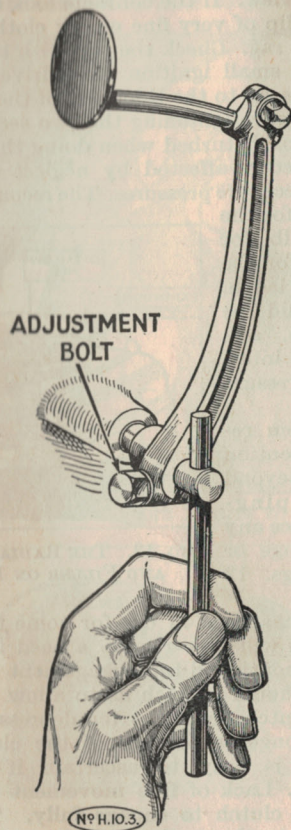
ADJUSTING CLUTCH PEDAL POSITION
